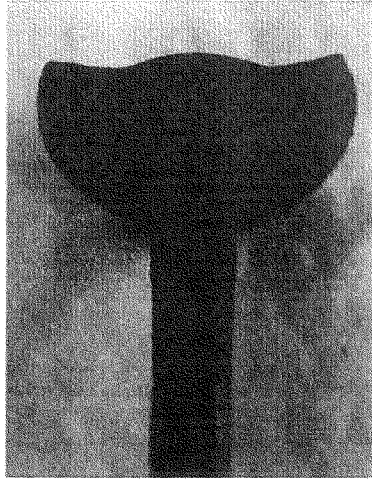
Broken Exhaust Valve from E15 Verado 1B812776, Top Valve in Cylinder 3
